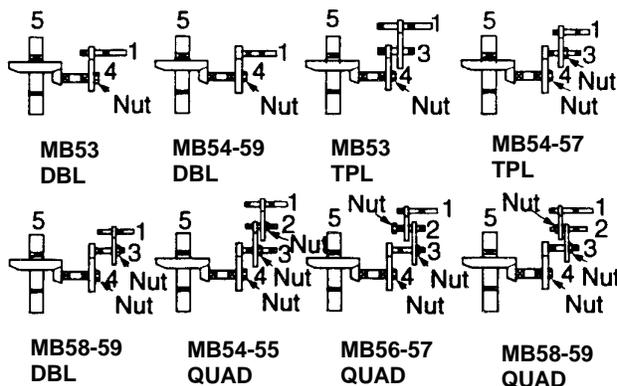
A – TYPICAL MB DOUBLE REDUCTION
